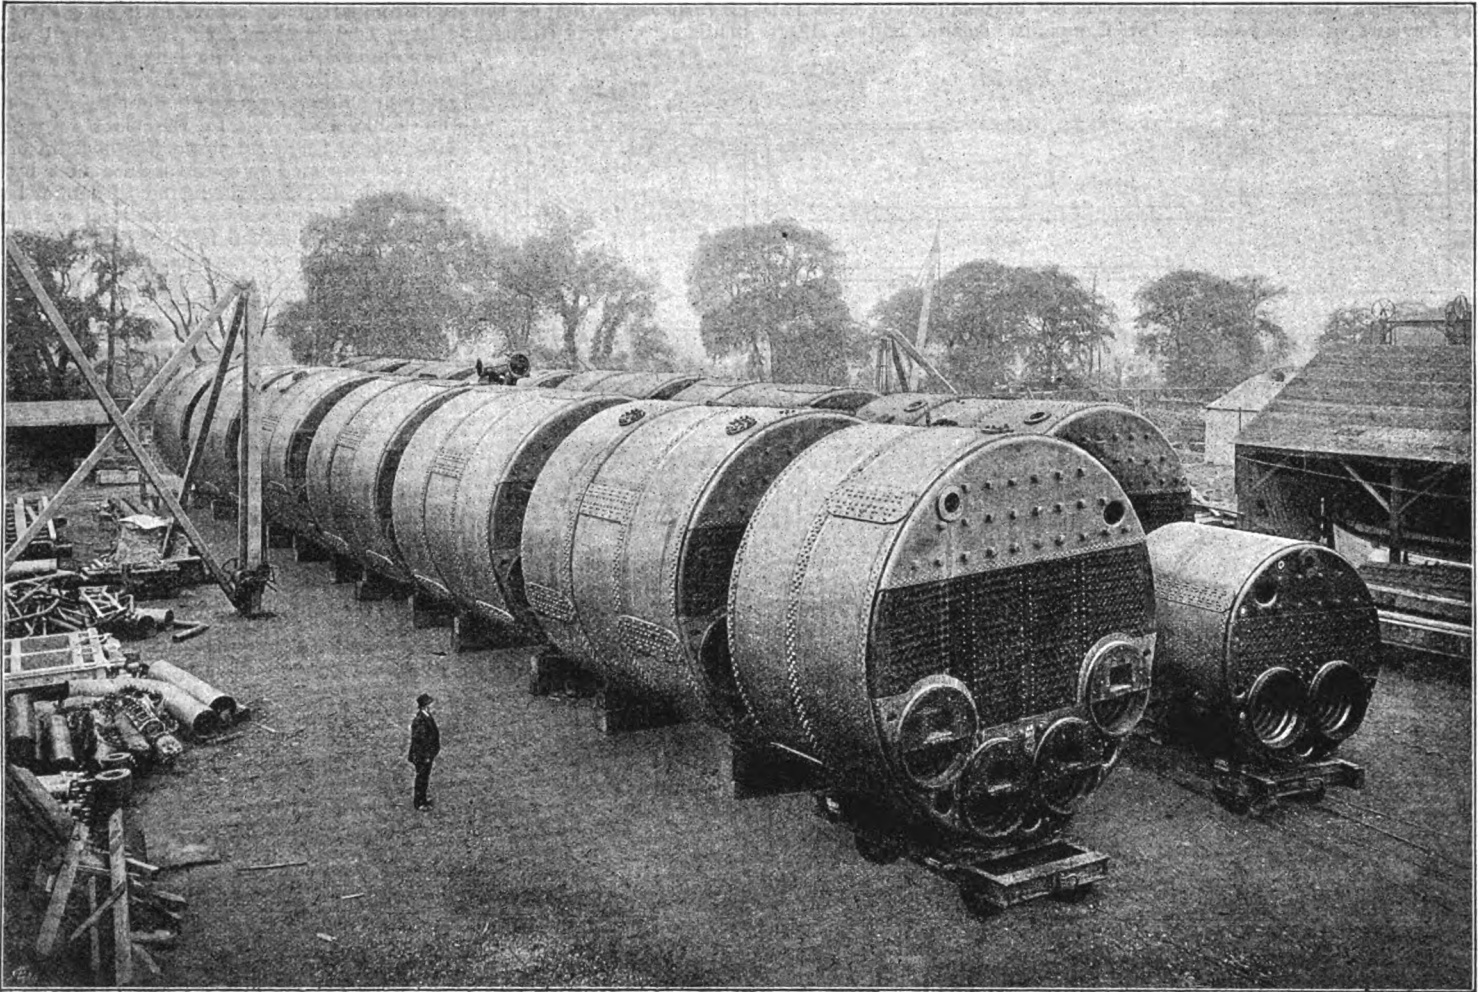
COMPLETE SET OF BOILERS OF "CAMPANIA" READY TO BE PLACED ON BOARD, JUNE 30, 1892.
